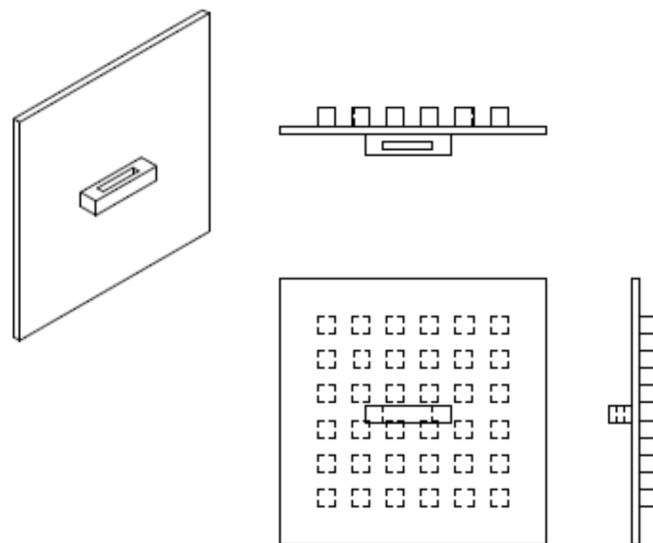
The sections diagram for concrete paver mold cover of new developed product
